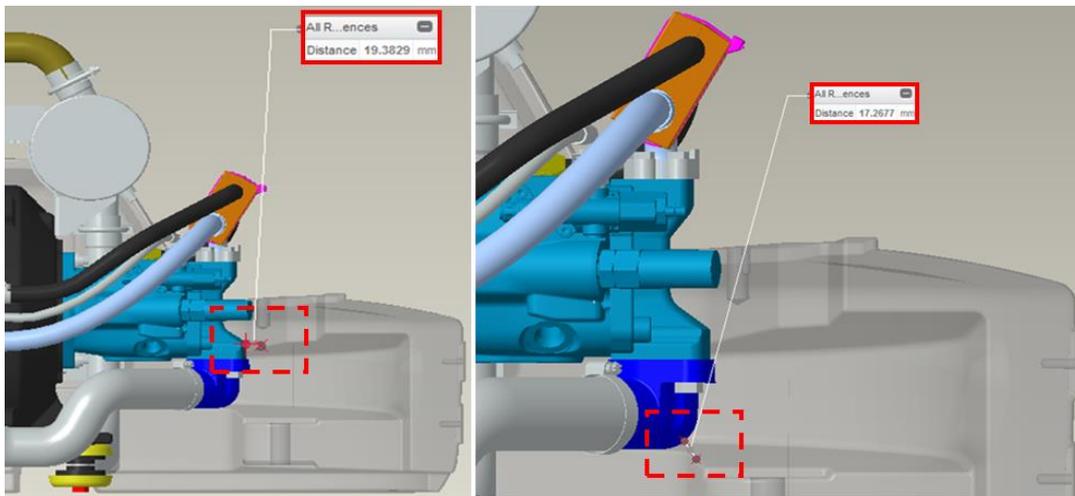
Lesser clearance from the required 25 mm between hydraulic pump and counterweight
